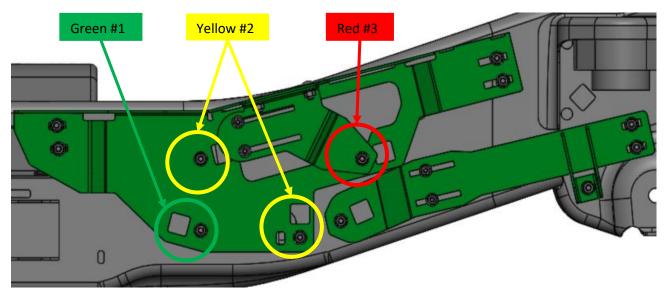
View of Frame with Frame Clip location circled; RAPTOR-301, 302, 303 shown installed
